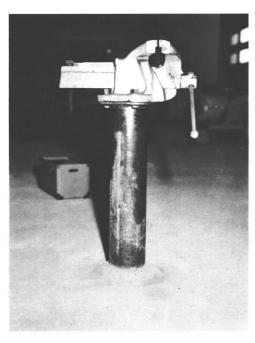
Heavy duty machinist vice anchored to pipe embedded in concrete floor.
